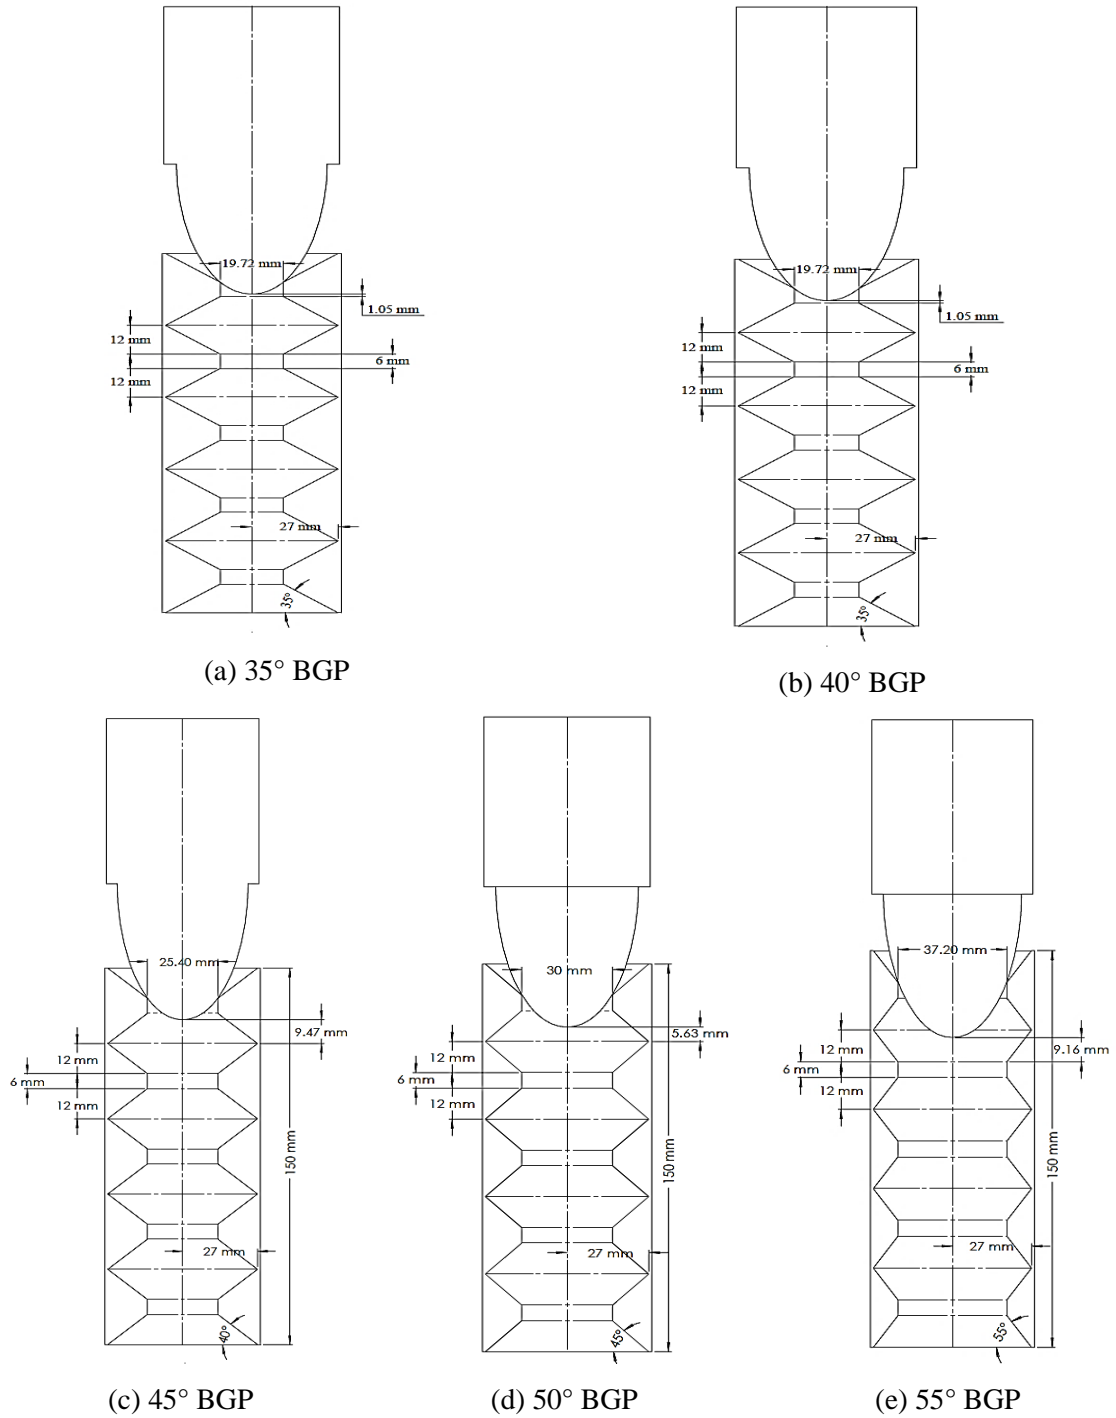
Dimensions for the bullet guiding pockets penetrated by the impactor, front section view
